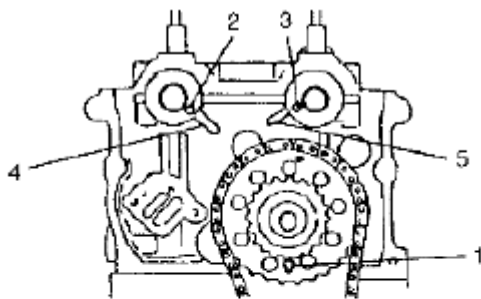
Identifying Match Mark On Crank Timing Sprocket
